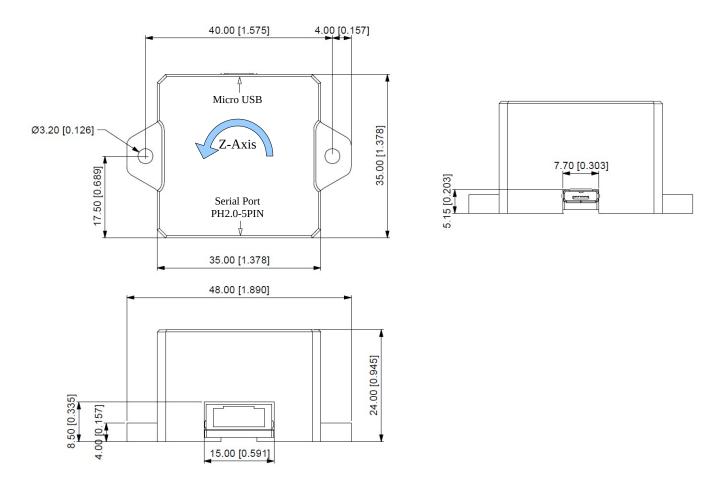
TransducerM TM210-G / TM210-GP Mechanical Drawing Unit: mm [inch]
